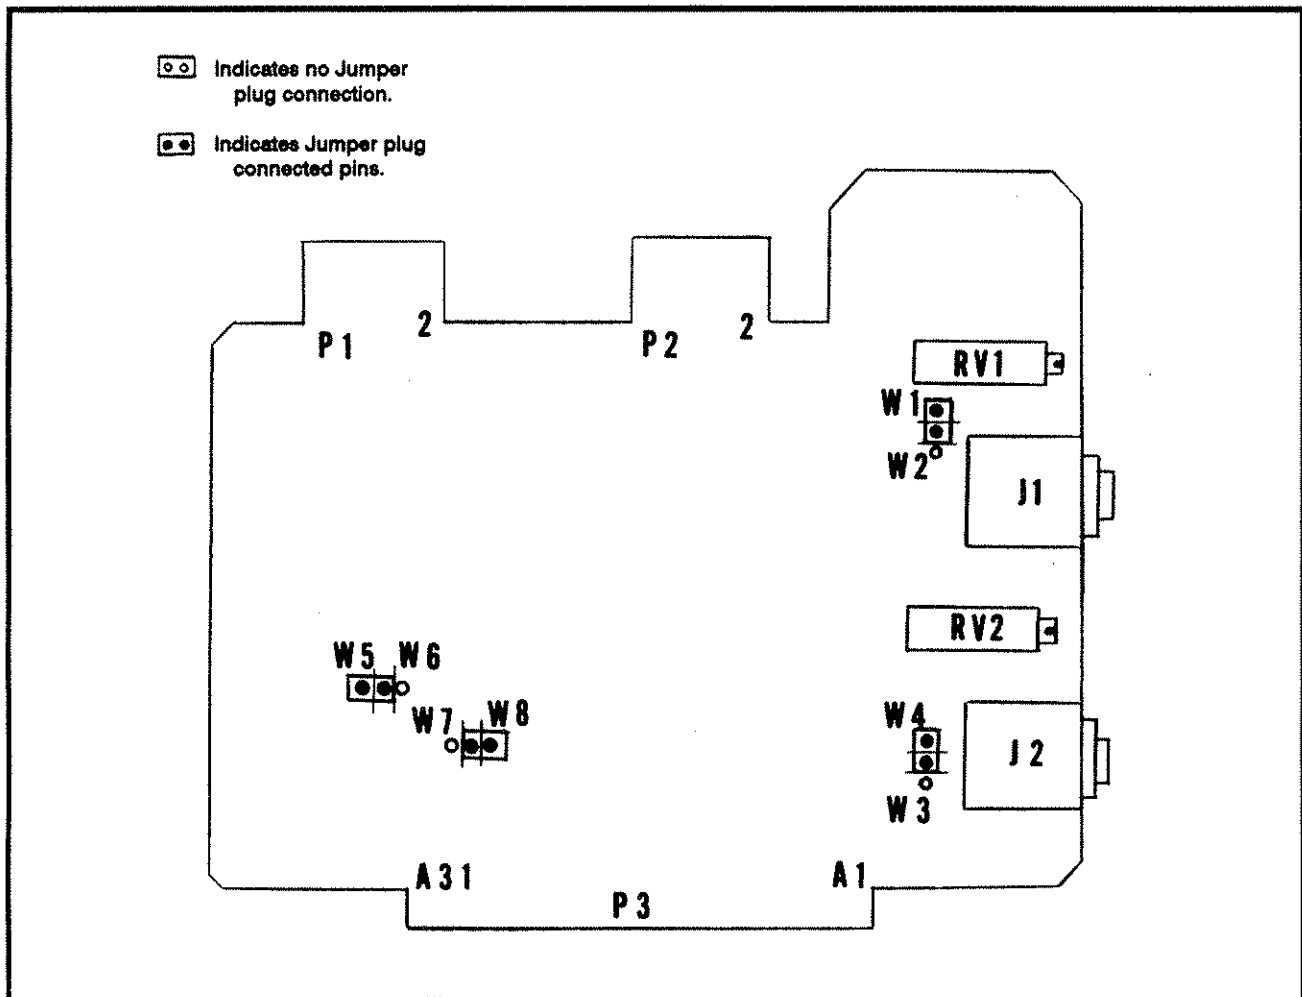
CODEC Board Assy 4A6, Jumper Plug Locations.
